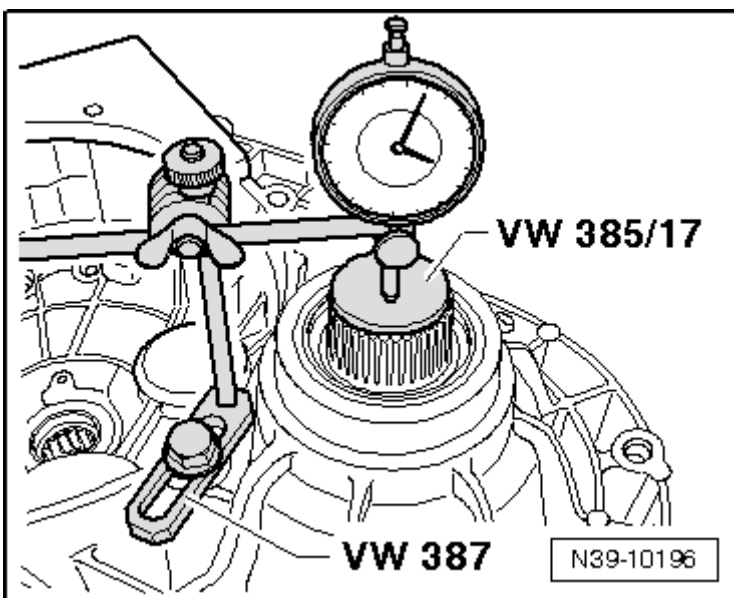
Identifying Shim Using Dial Gauge VW 521/4
